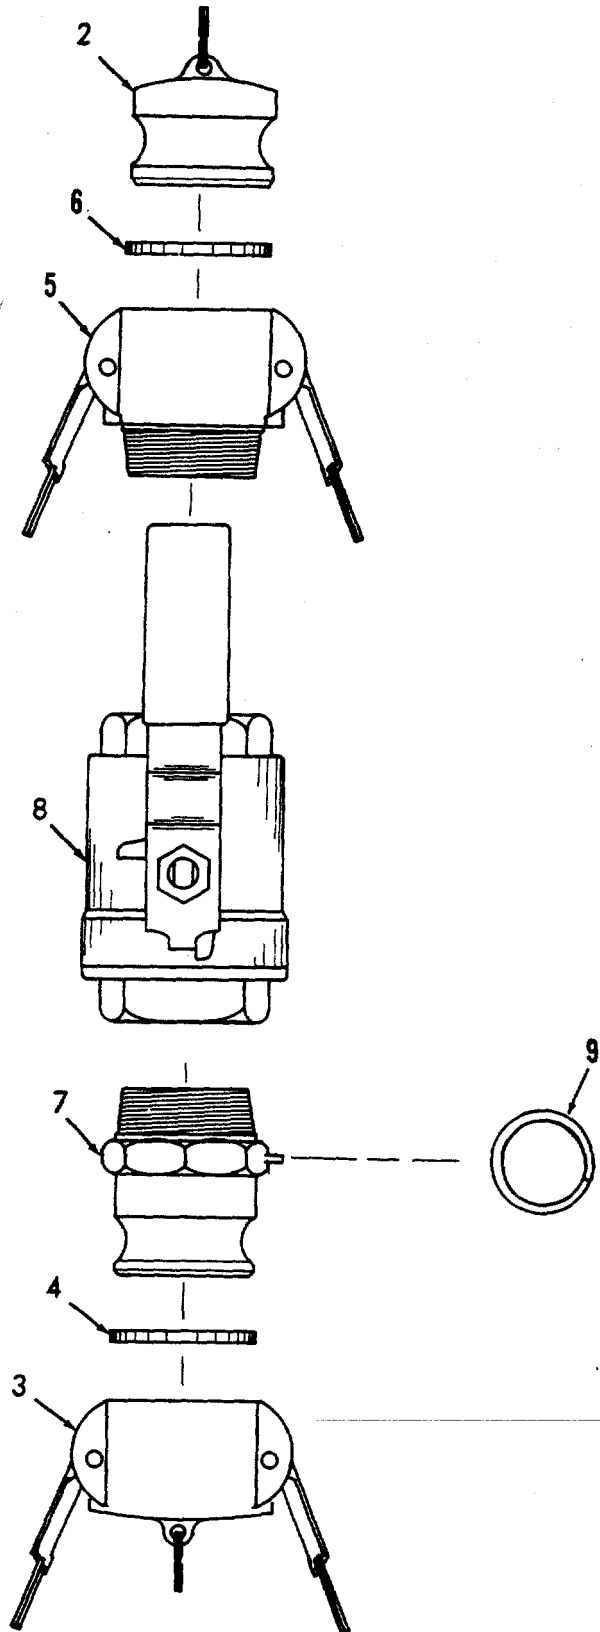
Valve Assembly, 1.50 in., Quick Acting.
